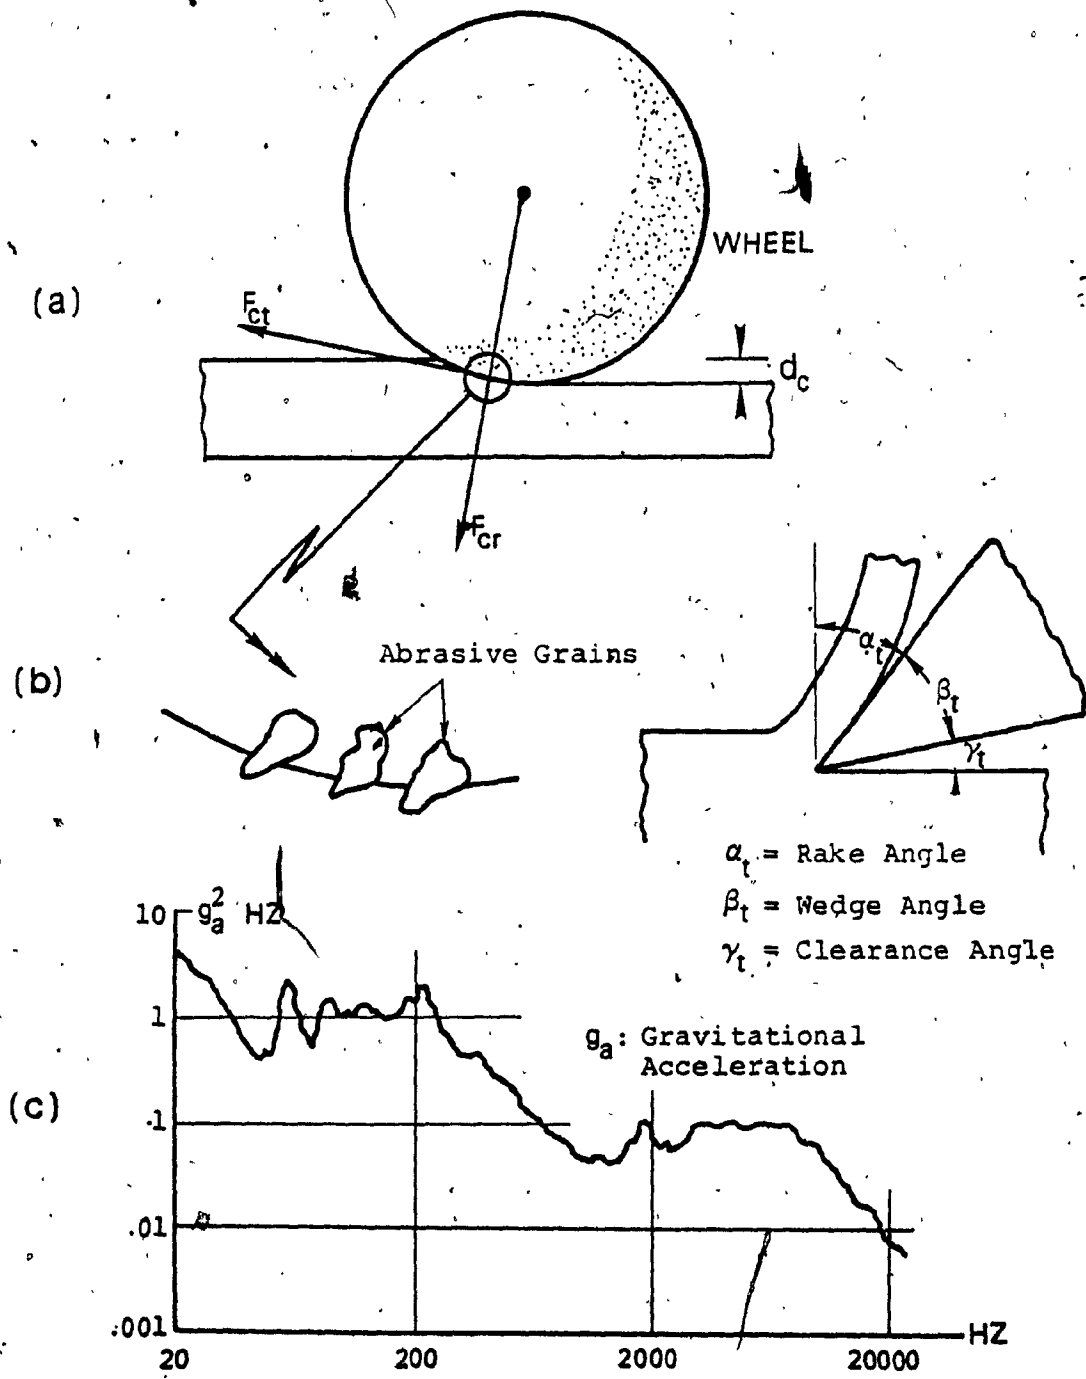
a) Components of the Cutting Forces in Grinding.
